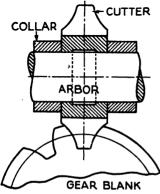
Cutting a Spur Gear by a Rotary Milling Cutter
